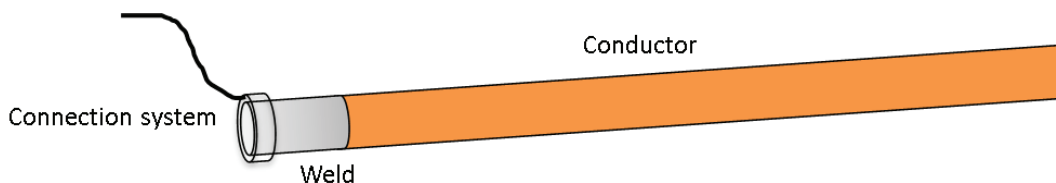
CUT with welded terminal and a ring connection to the solid section (lower resistance than the weld itself)
